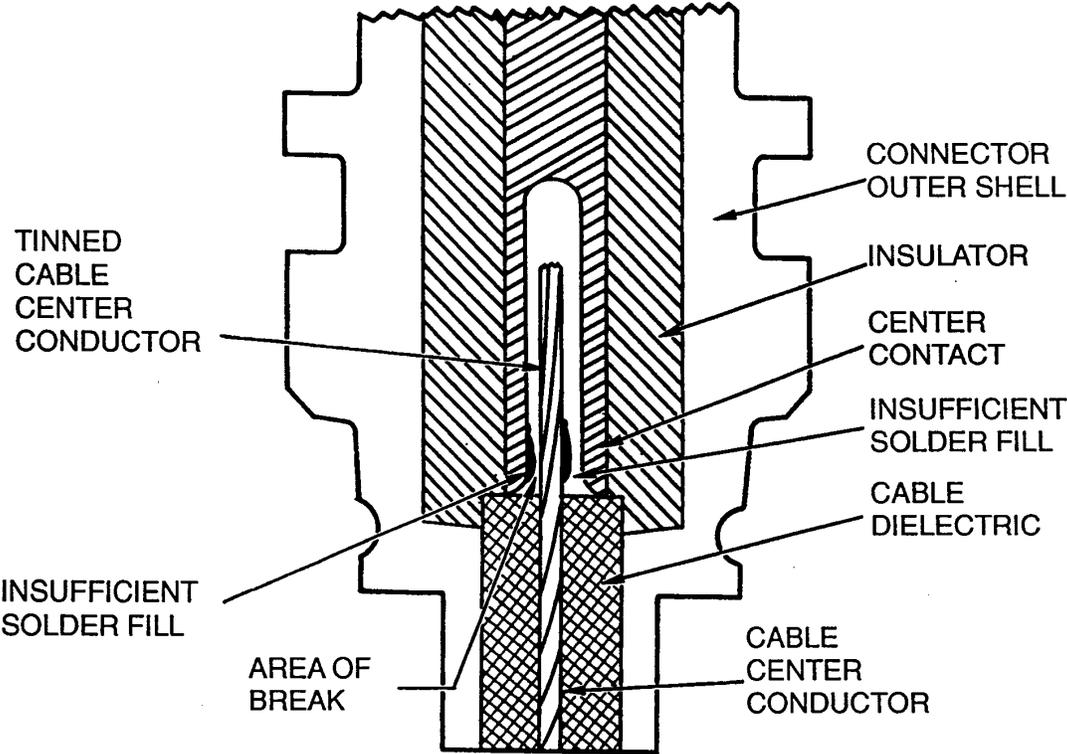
Broken Solder Joint Caused by Insufficient Solder Fill
